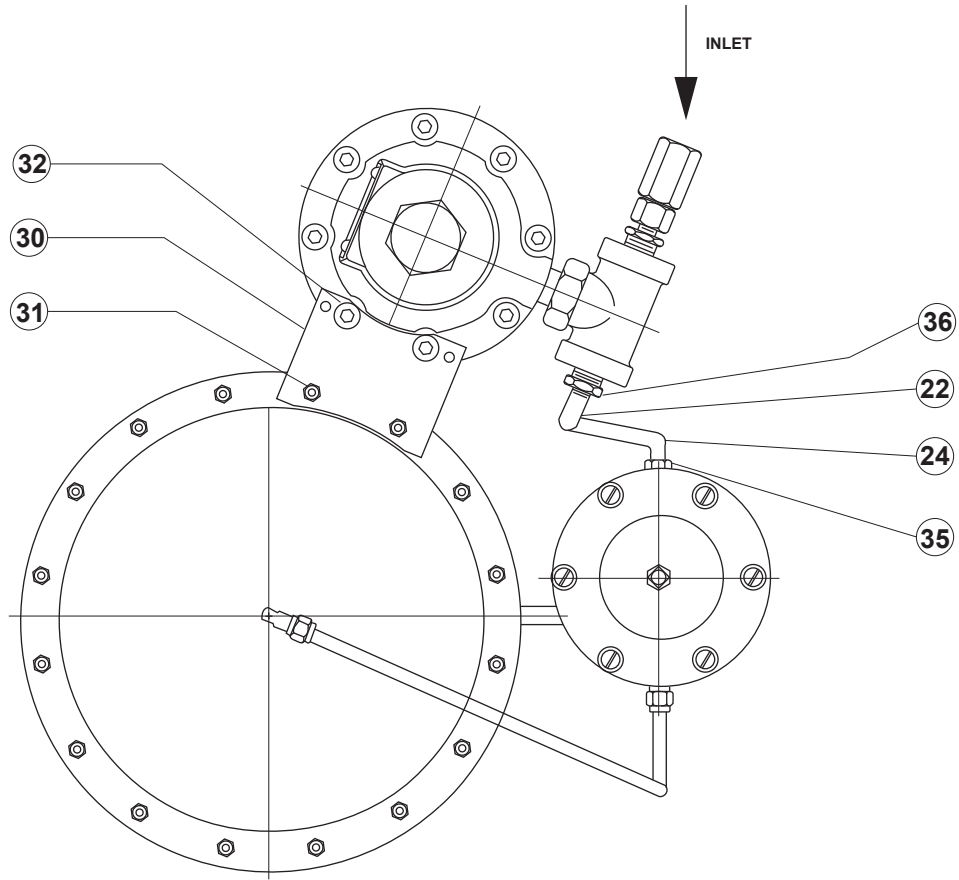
61 Series Pilot and Type 1806 Check Valve Mounting
